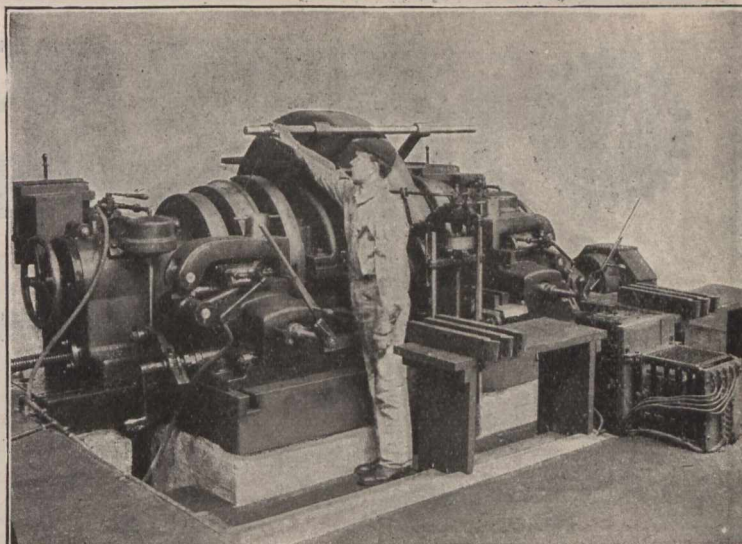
Locomotive and Coach Wheel Turning Lathe.
